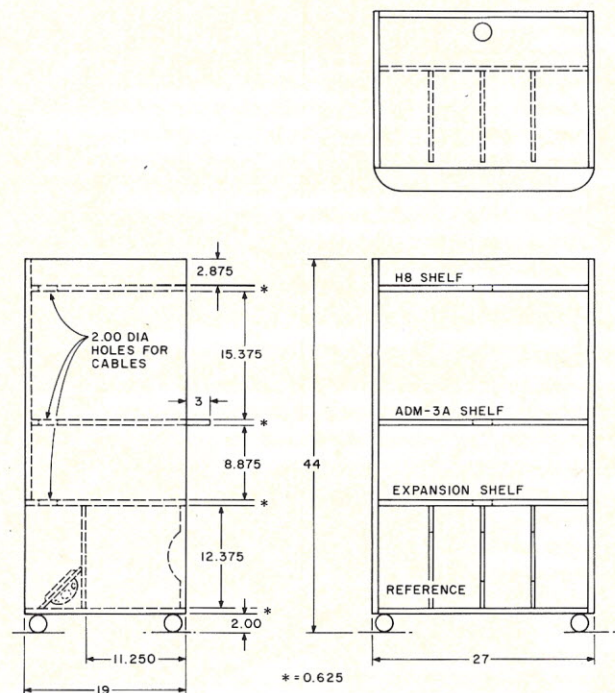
Plan for system console. All dimensions in inches (scale). All material 5/8-inch particle board, except for shelf dividers, which are 1/8-inch hardboard. About 100 1 1/4-inch #7 wood screws and marine-grade plastic resin glue provide strength required to hold heavy equipment. Flush back and 2-inch cable holes provide for uncluttered look. Three duplex sockets provide power to system—located in bottom back cavity. Two-inch furniture casters will be replaced with heavy-duty 3-inch hard rubber casters. Finished in flat black and eggshell blue.
